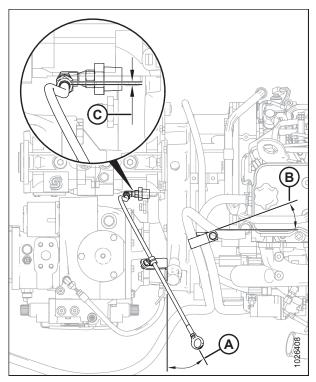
Gearbox Dipstick Components – View from Overhead A - 20-40° B - 15-25° C - 3 mm (1/8 in.)
